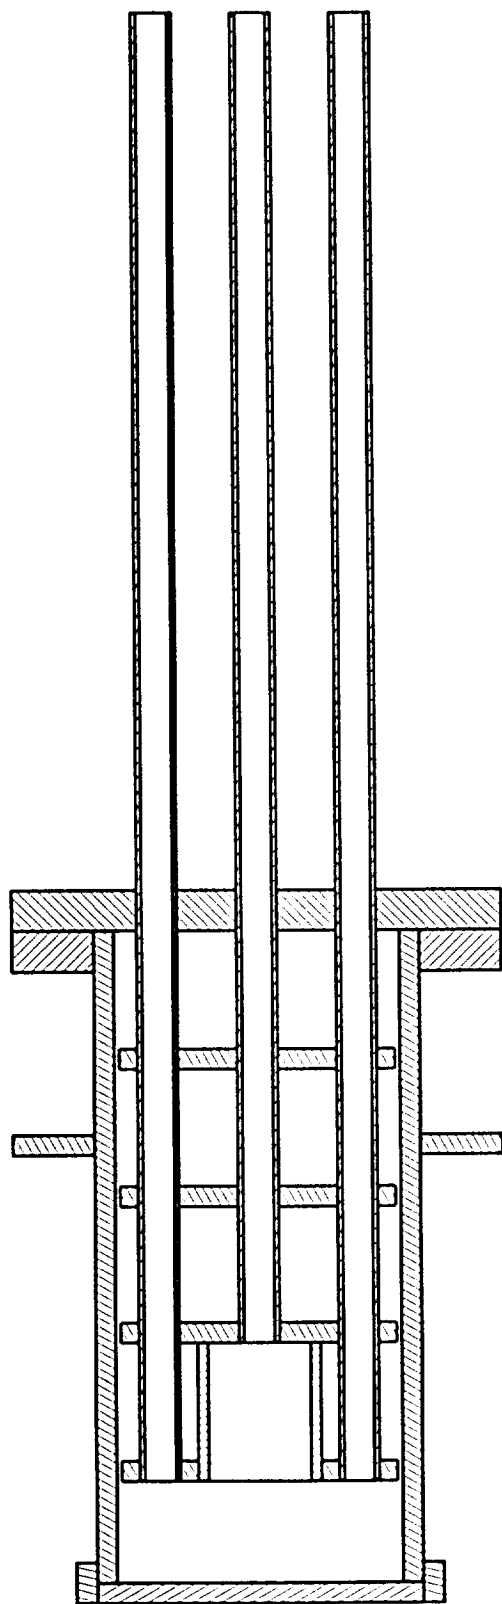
MODIFIED VACUUM CHAMBER DESIGN
